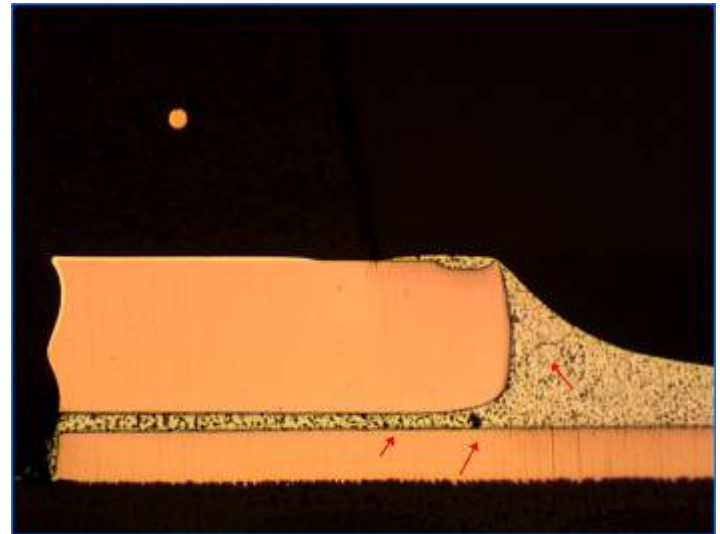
cross section, SN67, U54, right lead solder partial crack, 100x
